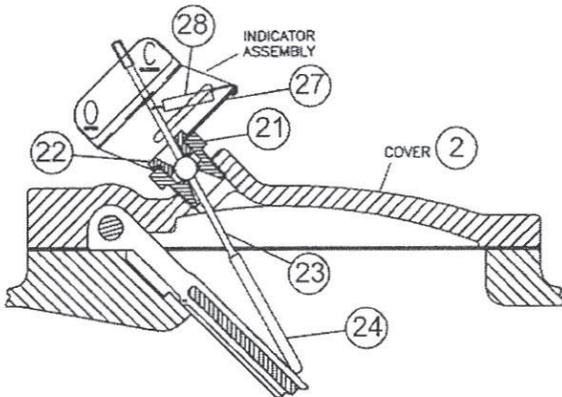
MECHANICAL INDICATOR ASSEMBLY
